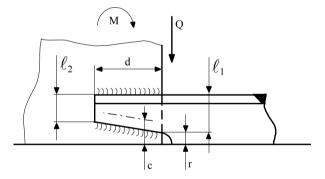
Fillet weld connections on overlapped profile joints: case a
